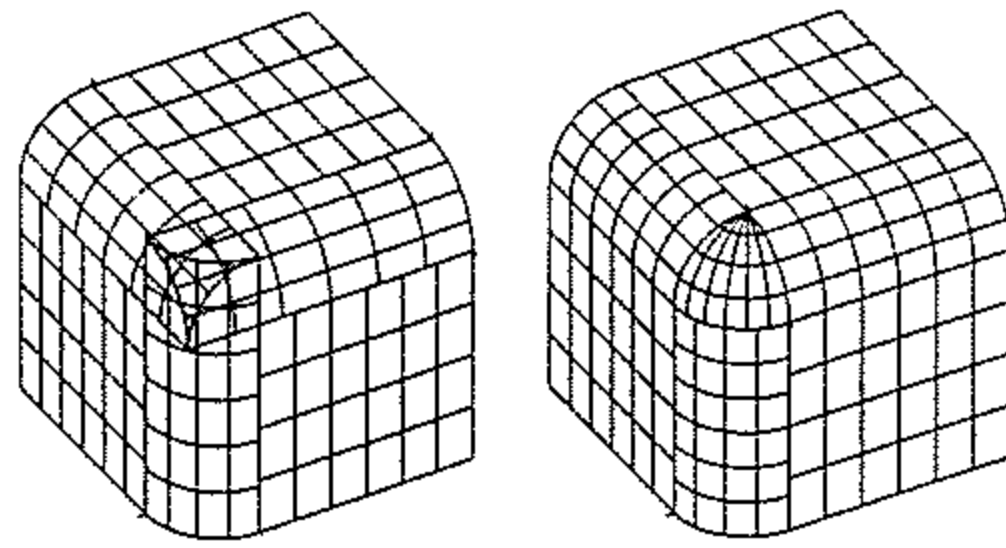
Intersecting fillet surfaces (left) and corner fillet surface (right)
